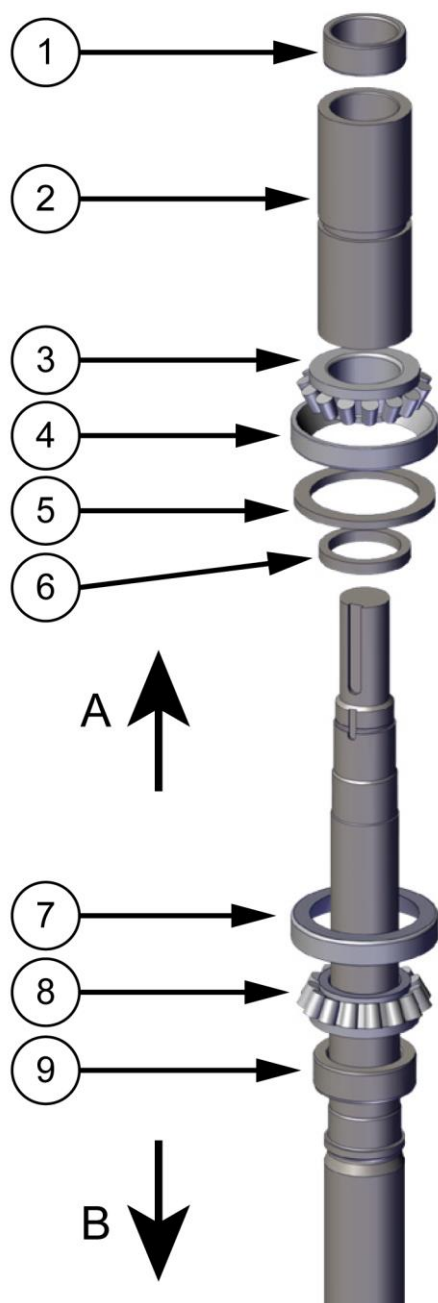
Fitting Shaft Sleeve Ejector, Lower Bearing, Bearing Sleeve and Upper Bearing Inner Ring to Shaft
